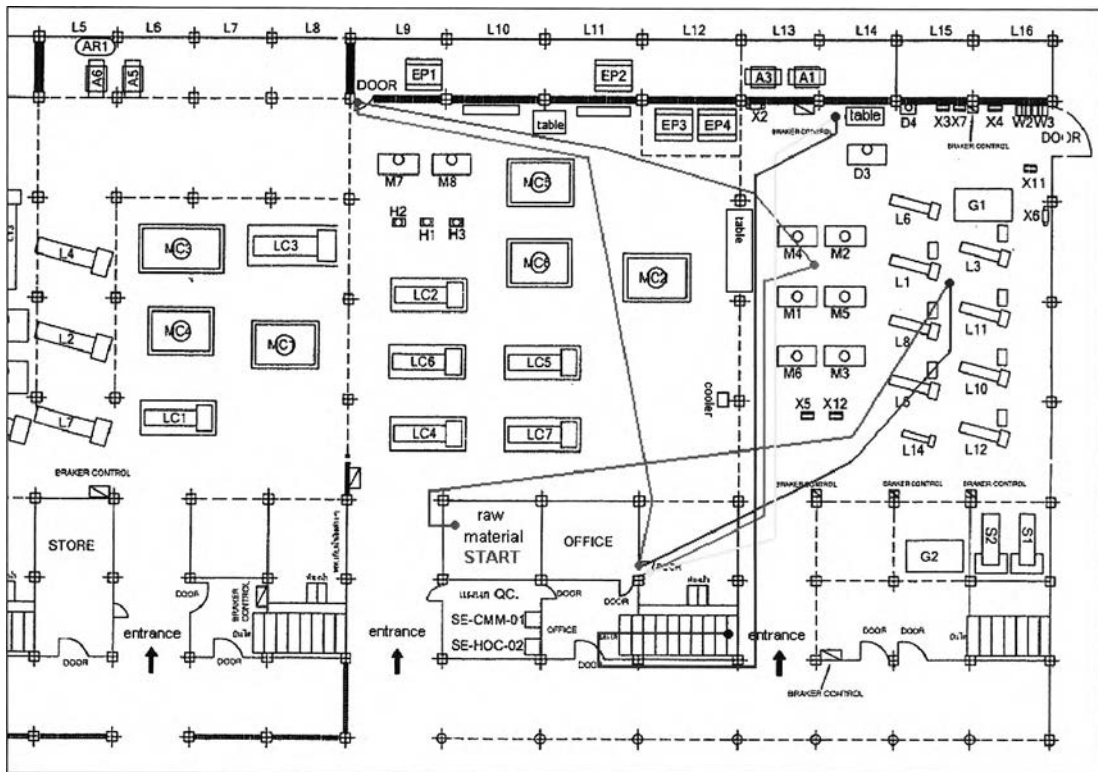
B – Inner hex holder string diagram (part 1 of 2, shaft) for design #2
